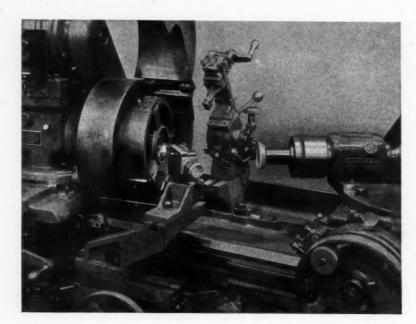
Internal Grinding Machine Equipped for Grinding a Taper Bore, Face, and Fillets in a Gear in a Single Set-up
